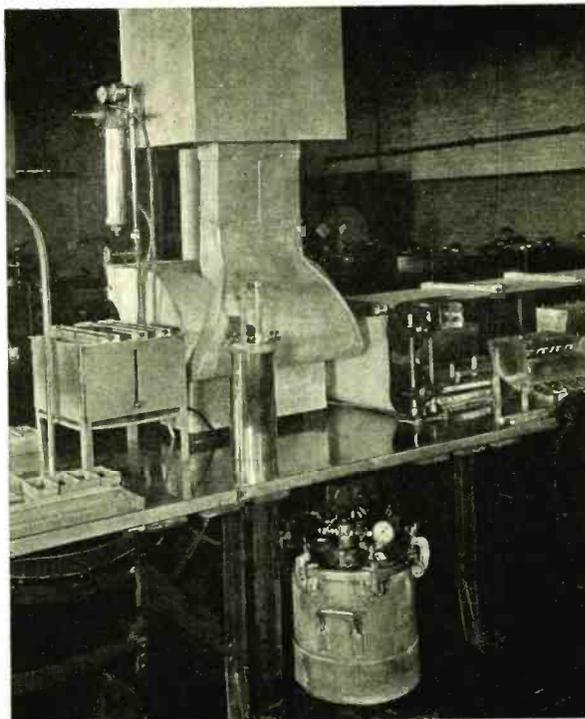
VIEW OF AUTOMATIC COATING EQUIPMENT SHOWING AGITATOR, FRAME CLEANER, DRIER AND CATHODE BINS.
